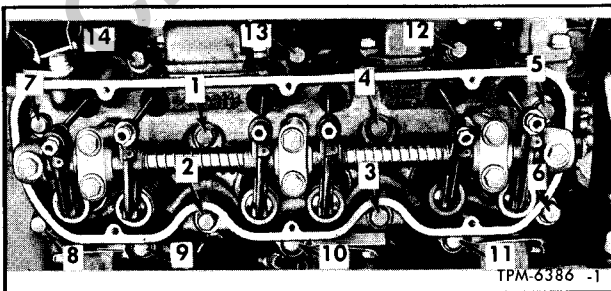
Cylinder Head Bolt Tightening Sequence on V6 Engine
